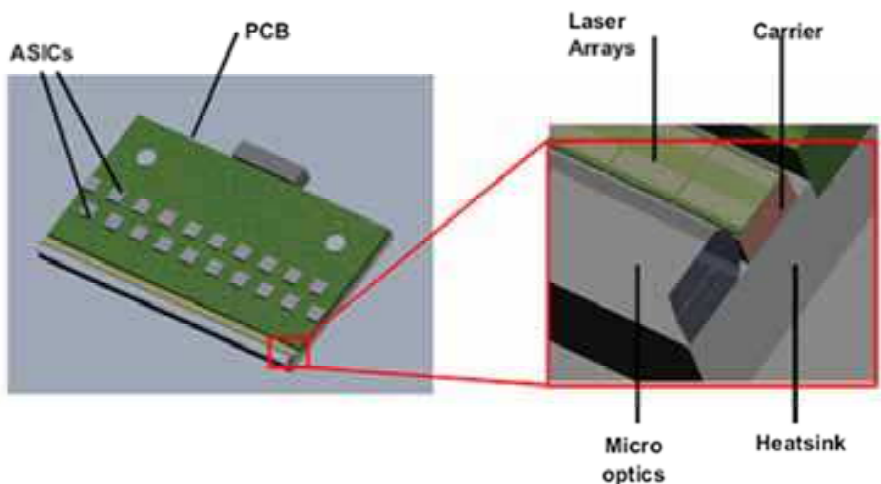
Illustration of a DLAM module with ‘super-array’ chip bonded to a carrier and mounted on a heatsink with ASiC and micro-optic array.
